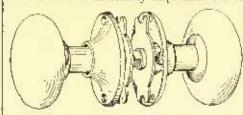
Knob and Spindle-screws covered Russell & Erwin Mfg. Co.
